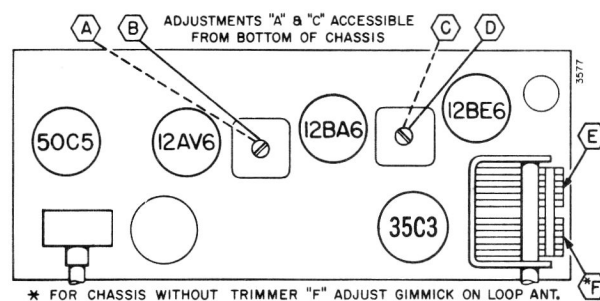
Top View of Chassis Showing Tube and Alignment Points Locations.
